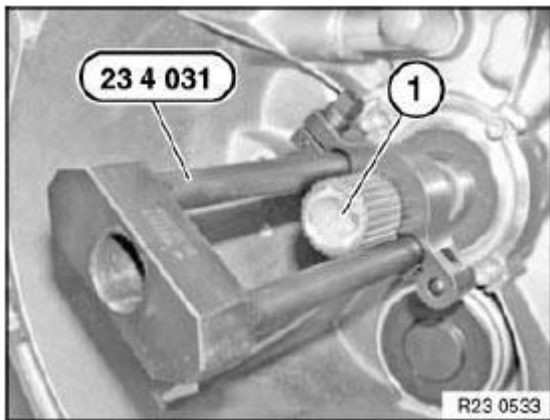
Identifying Pressed-In Grease On Drive Shaft
